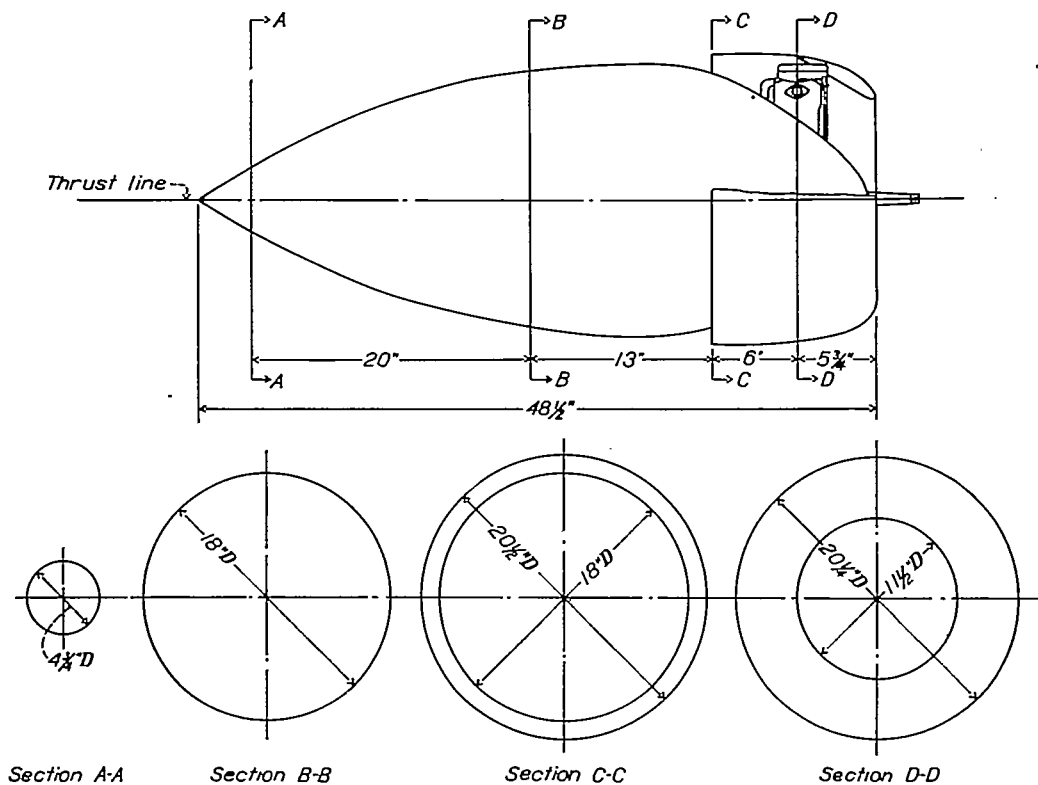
N.A.C.A. cowled nacelle and engine assembly.
